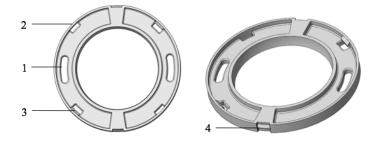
Detailed view of the bottom bracket that is mounted to the ceiling or wall.
